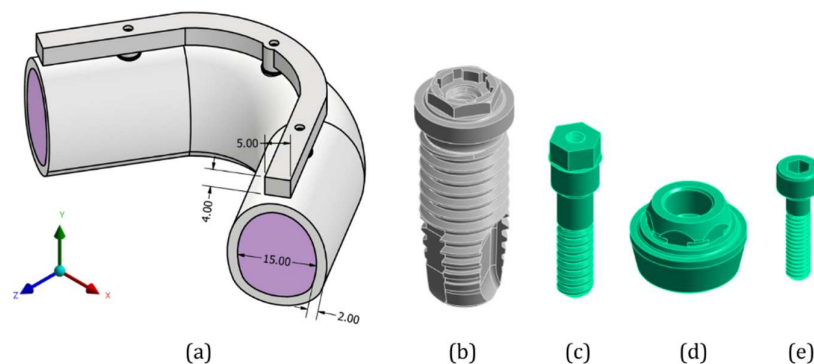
Components of the Dental Implant FE Model: (a) Full bone-implant assembly; (b) Fixture; (c) Screw between abutment and fixture; (d) Abutment; (e) Screw between framework and abutment
